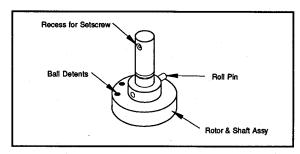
Correct Assembly of Rotor, Shaft, & Roll Pin
